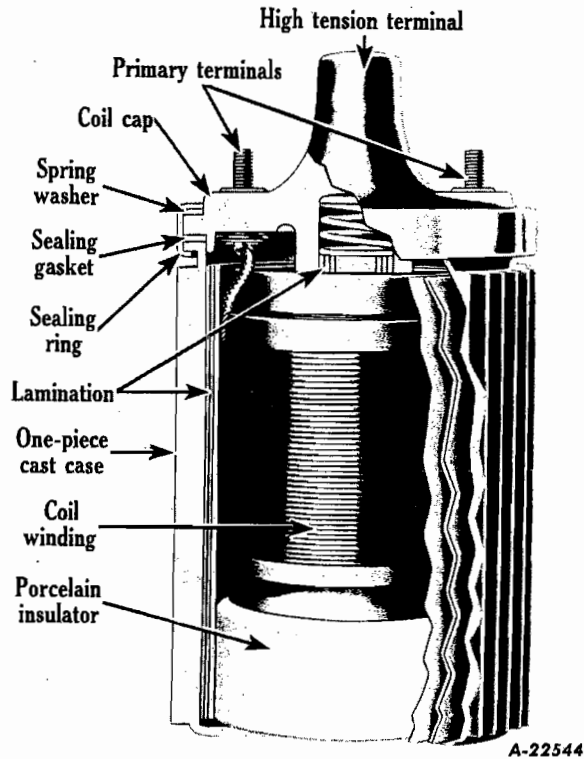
Cutaway view of heavy duty oil-filled coil. Coil case utilizes fins to aid in cooling for better ignition coil performance.
